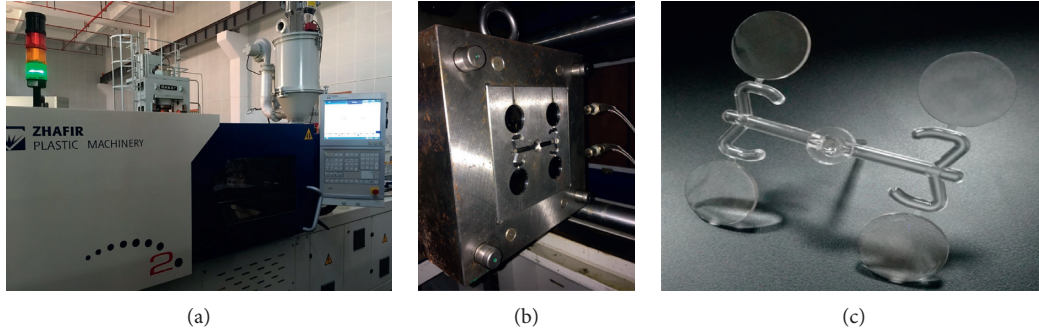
Experimental setup: (a) injection-molding machine; (b) injection mold; (c) molded plastic lenses.
